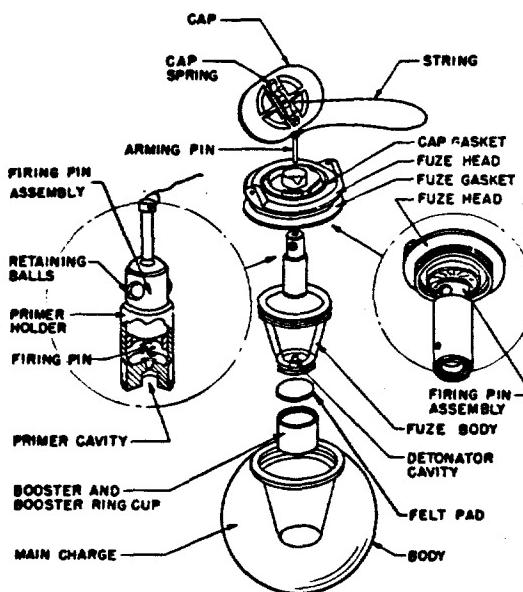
Disassembled view of T-13 grenade and T-5 fuze.
